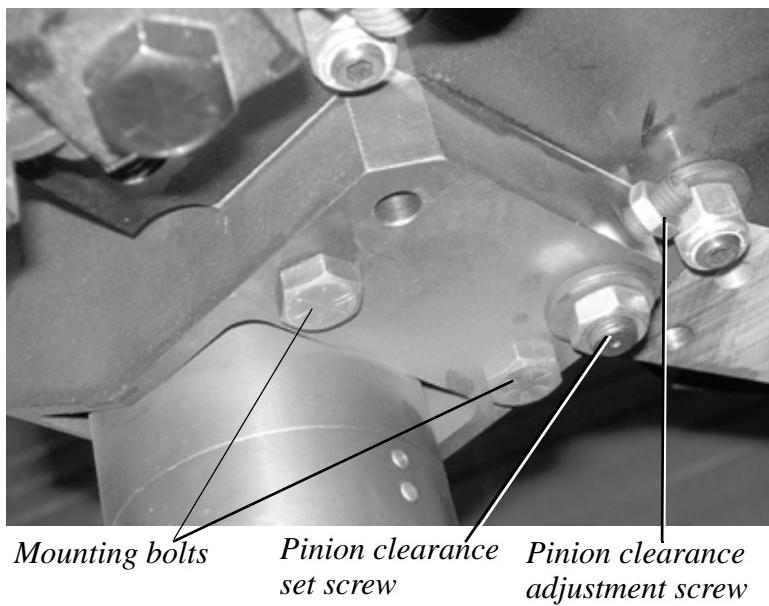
Two bolts fasten the motor mount to the frame. To set the pinion clearance, loosen the set screw and turn the adjustment screw. Re-tighten the set screw.
